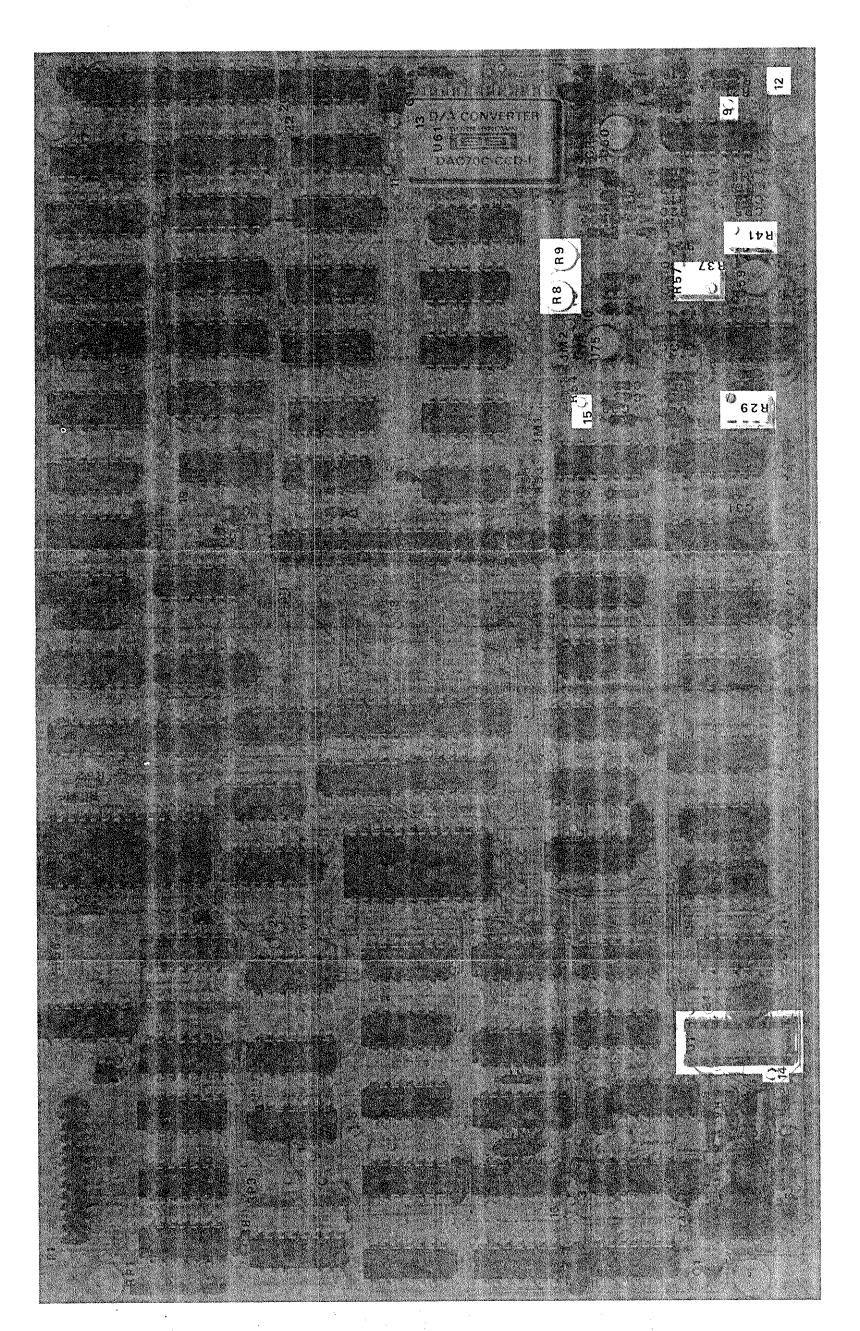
Locations of Test Points and Adjustments, A6 PCB
